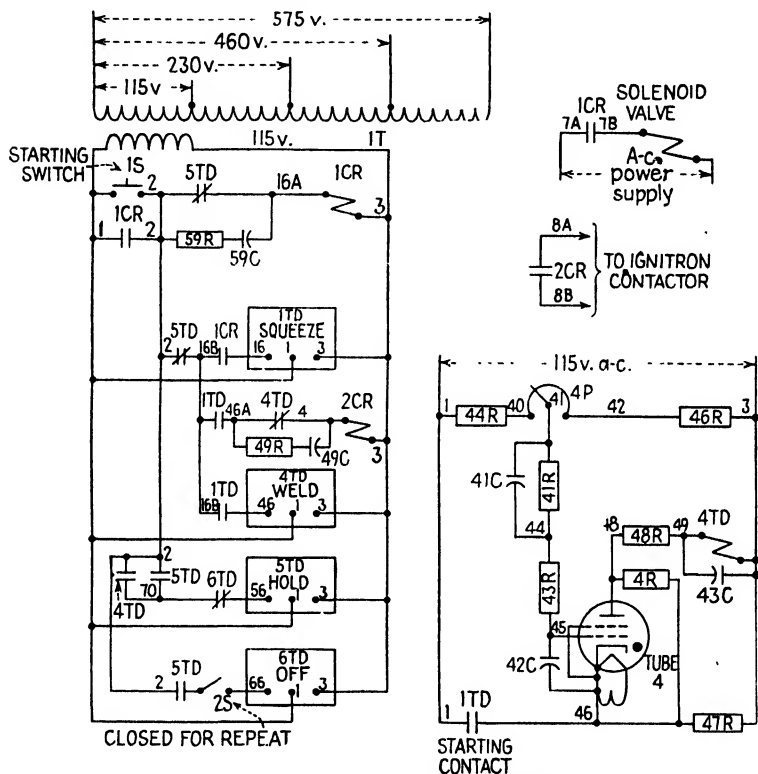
B.—Sequence weld timer (CR7503-F118).
